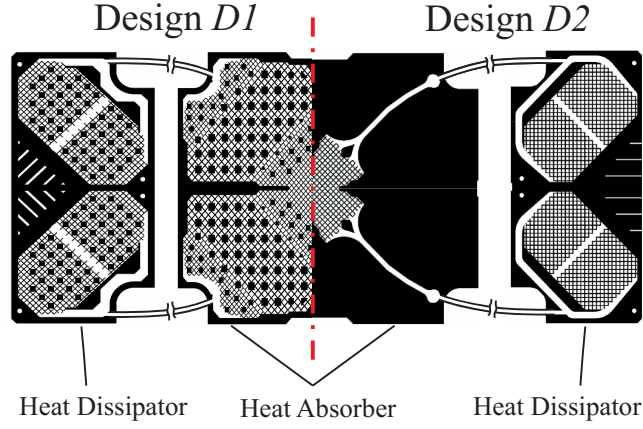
Top view of single copper sheet layer of RADIOS heat spreader plate designs D1 and D2. Connection between plates is illustrated schematically. Multiple stacked layers with pattern offset form the spreader plates containing the fluid (cp. Fig. 5.3).
